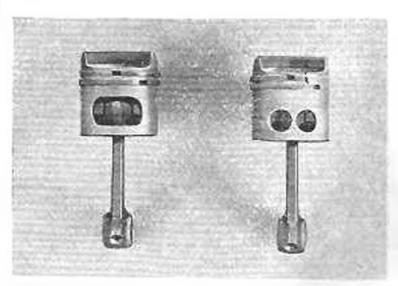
Modified piston for the McCoy .29 (left), with a standard piston (right).
